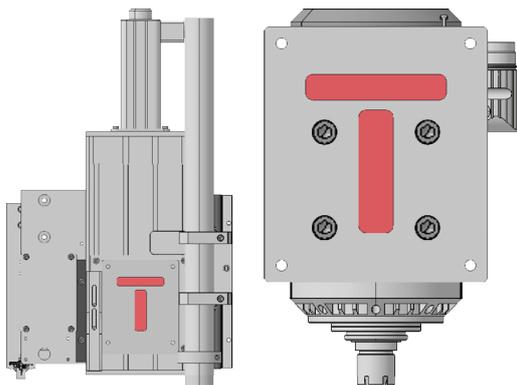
(A) INTAKE ON THE MACHINING UNIT, (B) RECESS ON THE SPINDLE PLATE (REAR VIEW)
